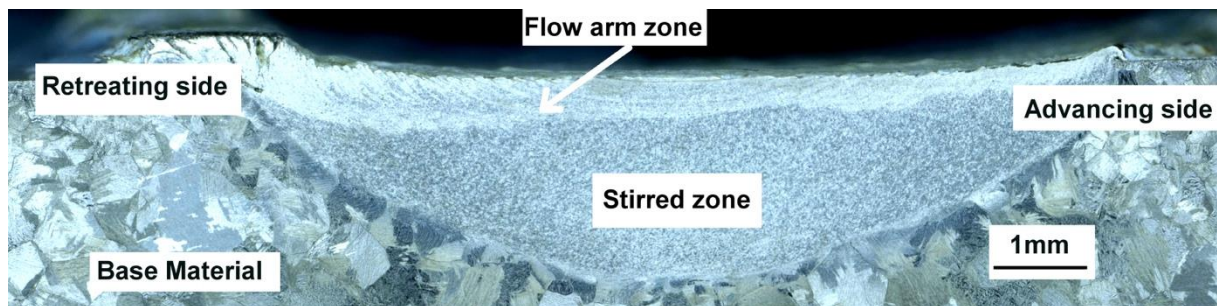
Cross-section perpendicular to the welding direction of a coarse lamellar sample welded at 50 mm/min*420 rpm.
